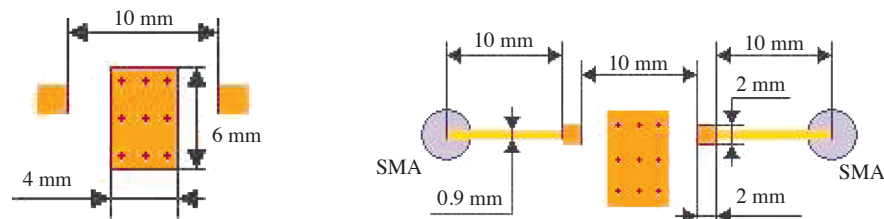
The test pad on the TOP: (a) with the soldering pads and (b) with the interconnections to the SMA connectors.
